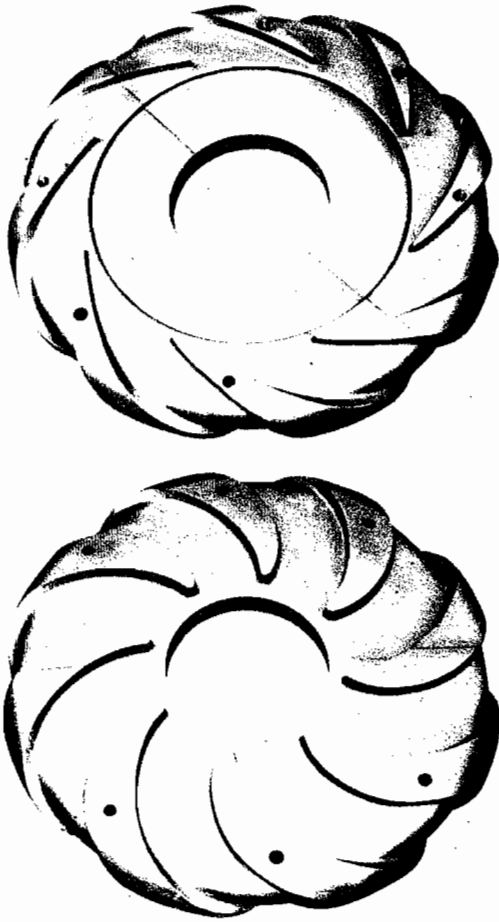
Integral Vaned Diffuser and Return Channel Assembly. (Upper view: front side, lower view: return channel).
